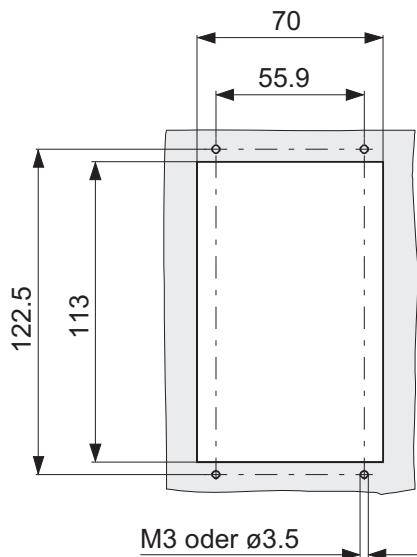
For mounting the unit into a control panel, this cut-out is required
